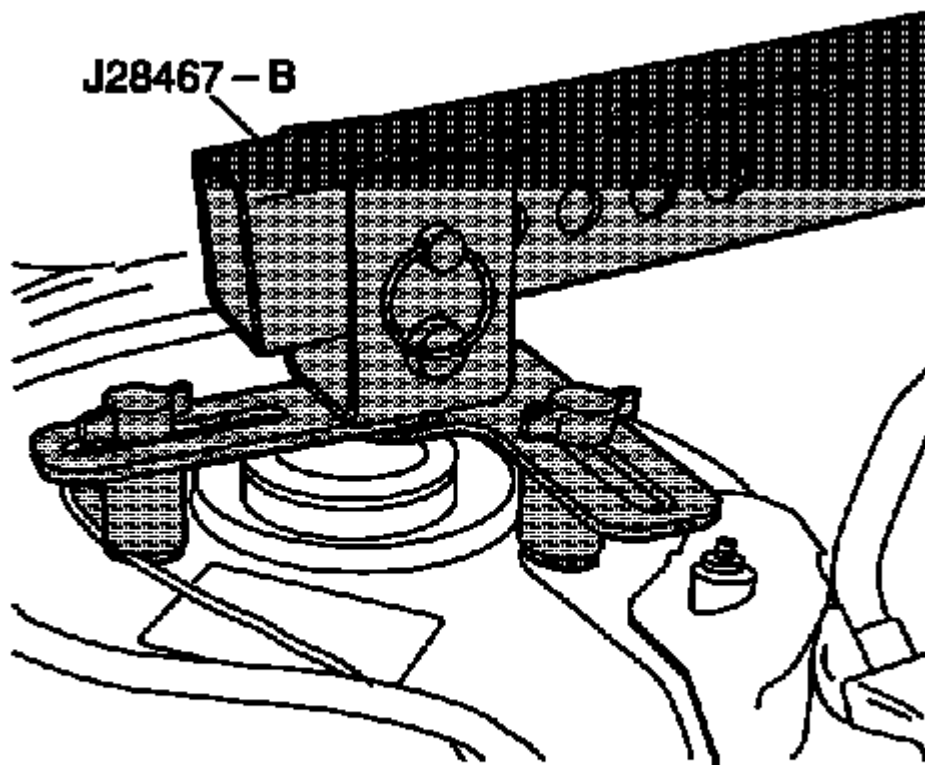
Installing Thread Support Nuts (J 28467-33A)
